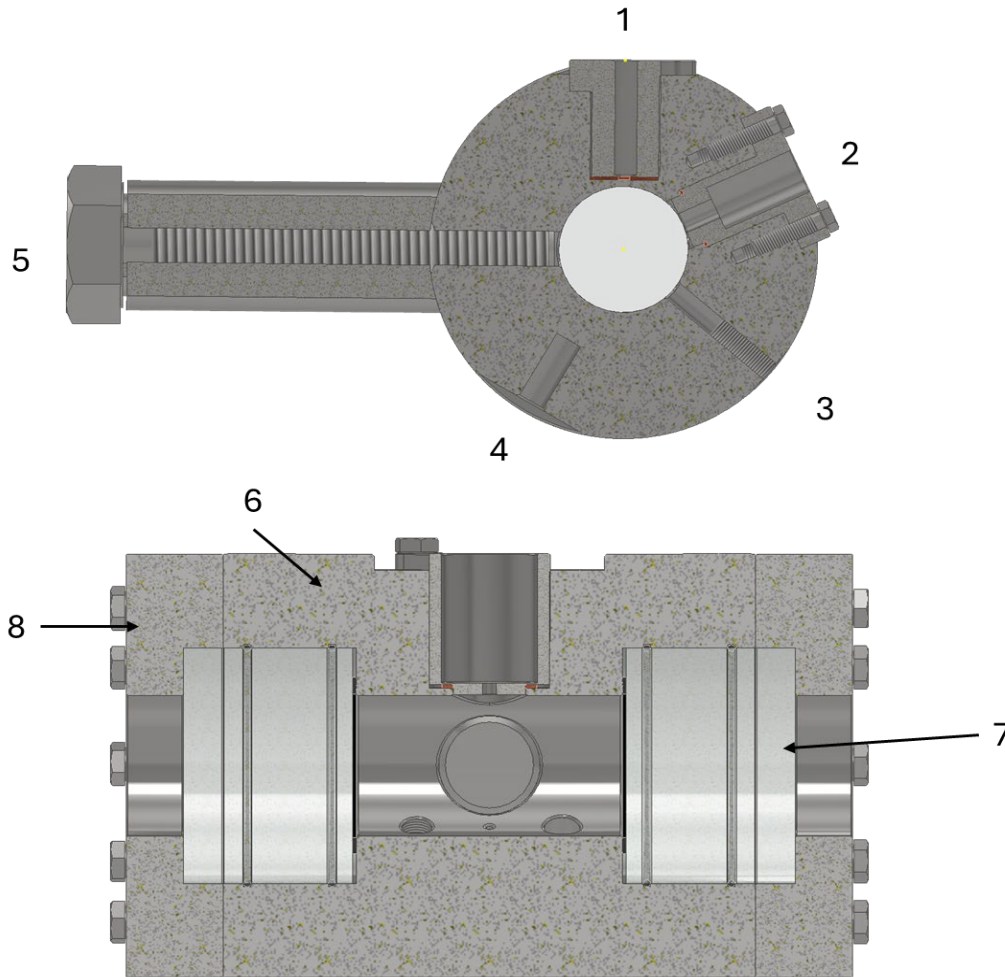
Sectional views of the CVCC design: (a) Detail of injector interfaces and volume adjustment; (b) Overall assembly showing optical windows and chamber cover. 1 – Large injector adapter, 2 – Spark plug & inert gas injector adapter, 3 – Sensor mounting, 4 – Air & inert gas inlet, 5 – Volume adjusting screw, 6 – Chamber body, 7 – Optical windows, 8 – Bolted cover. Manufacturing considerations include conventional turning and milling operations, defined surface quality requirements at sealing interfaces, and an appropriate welding and heat treatment sequence for the assembled pressure components.
